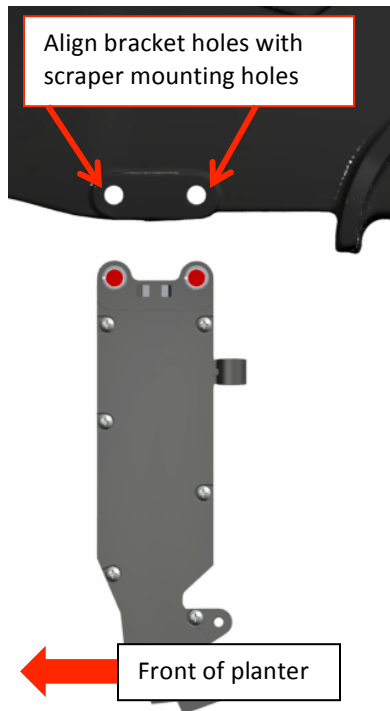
Quick Attach Firmer Bracket Aligned with Disk Scraper Mounting Holes
